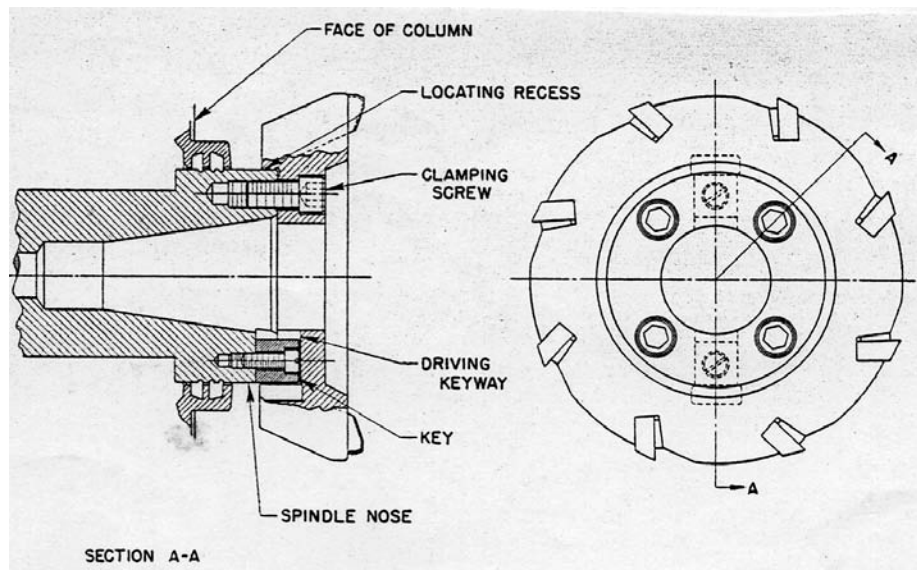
Mounting a face mill on the spindle nose of a milling machine
